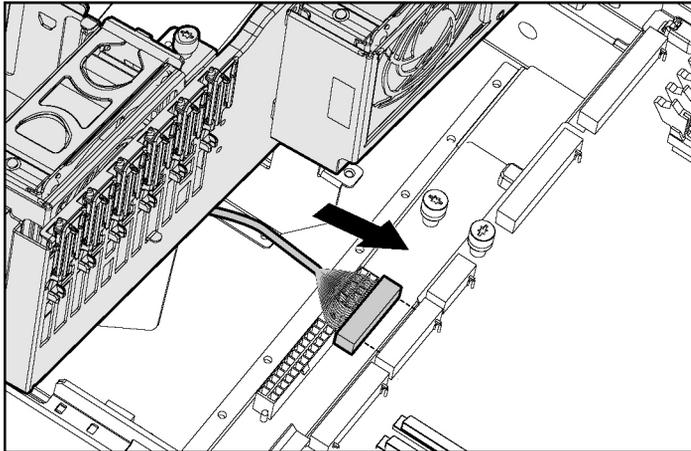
Cabling hot-plug fans to the fan connector on the system board
